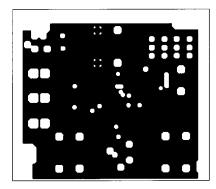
Recommended NJB PC Board Layout: Upper Inner-Layer Layout
